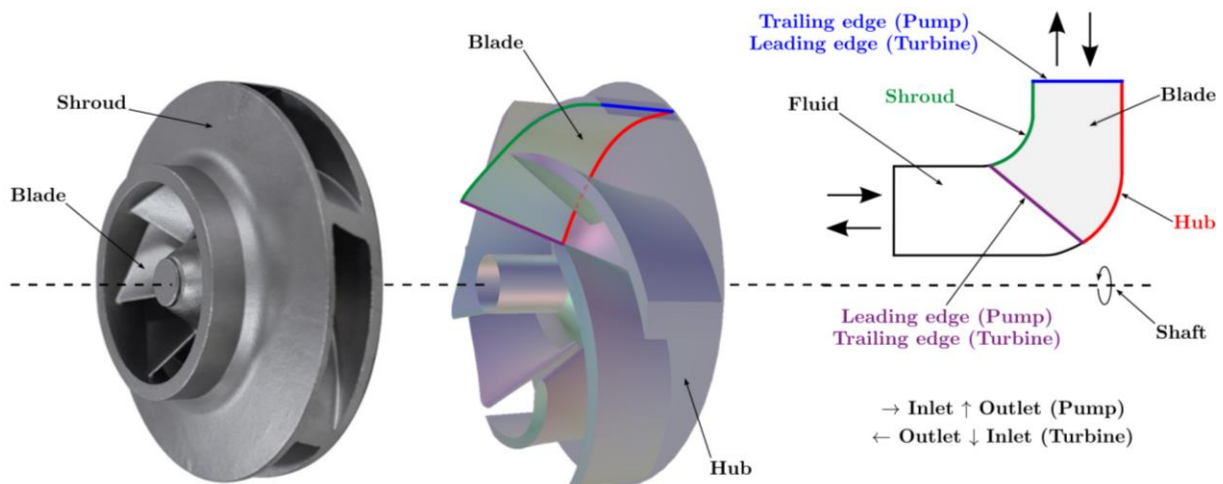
Hydraulic profile from the three-dimensional view of the impeller
